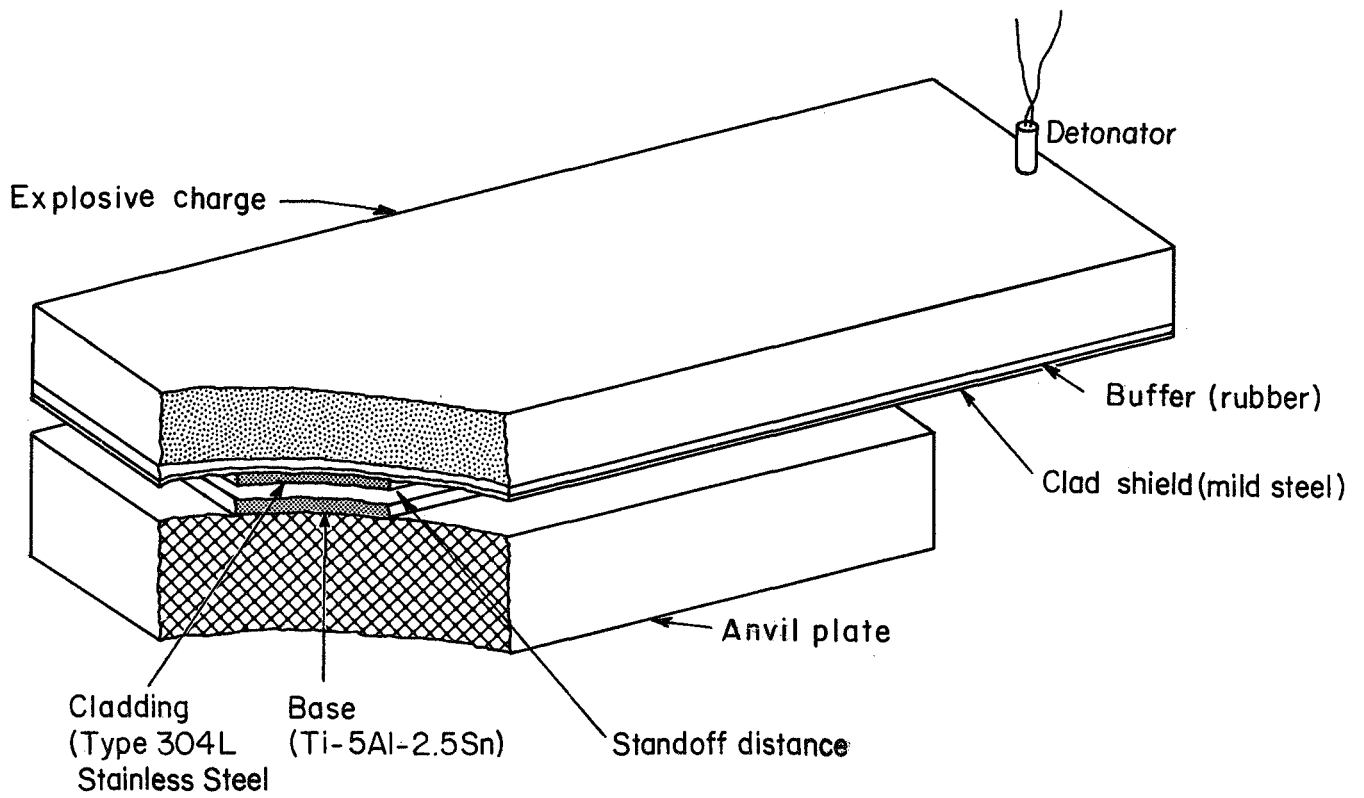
COMPONENT ARRANGEMENT FOR PARAMETRIC WELDING SPECIMEN
